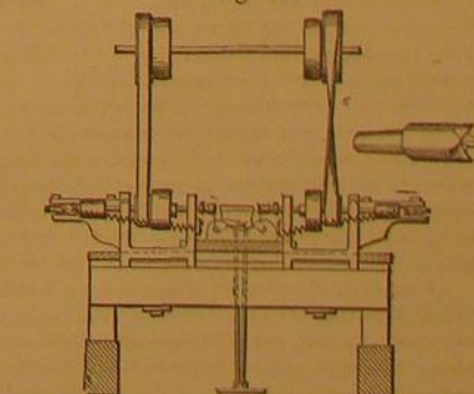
is a machine for riveting hinges. Peculiarly shaped revolving milling tools spread the pintle when forced against it, and form the head.
